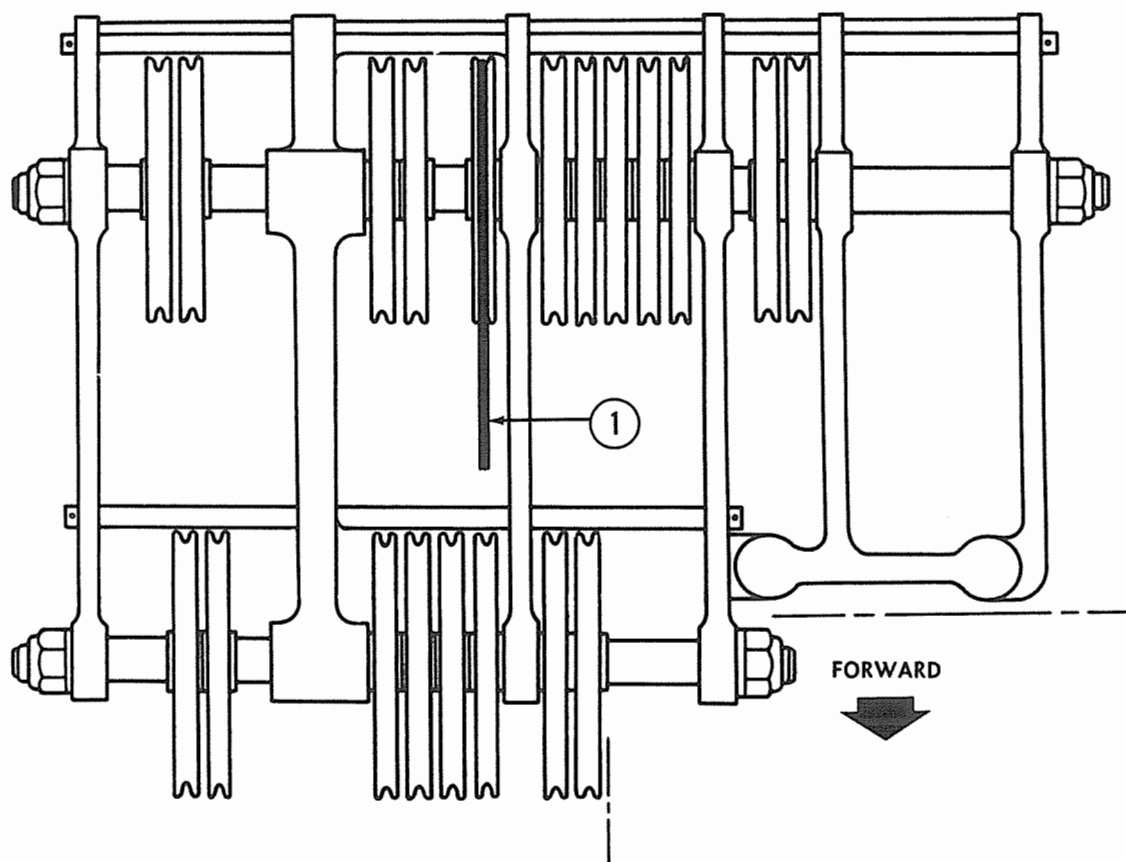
(Sheet 2 of 9 Sheets). Tail Gear Locking Control System — Tail Wheel Rigging
